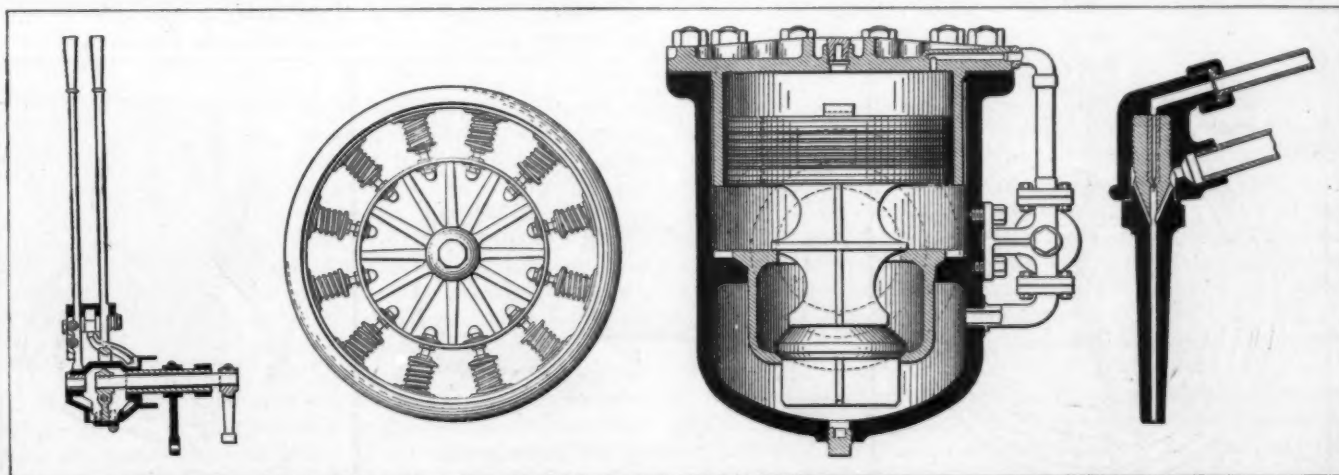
Thomas control mechanism. Fig. 2—Wall spring wheel. Fig. 3—Collin regulating valve. Fig. 4—Burdett welding torch
